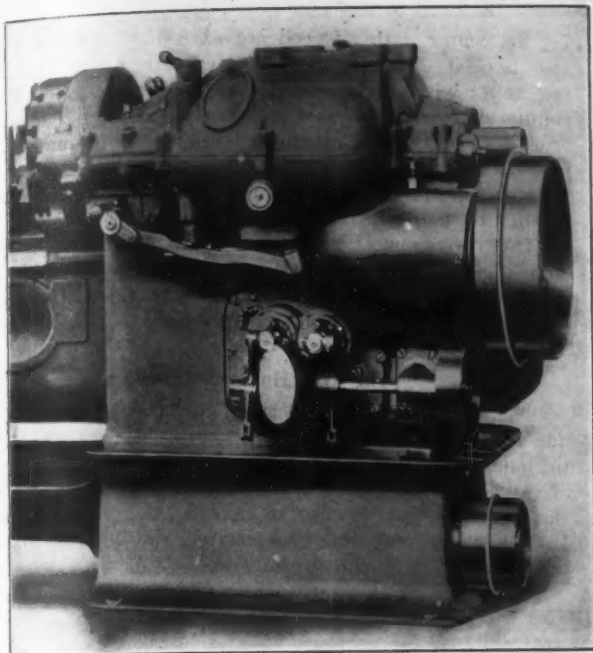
Rear View of the Headstock, Showing the Driving Mechanism.
